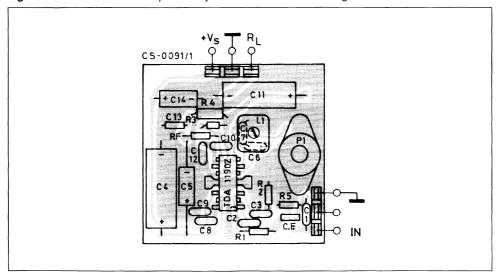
P.C. Board and Component Layout of the Circuit Shown in Fig. 16.
